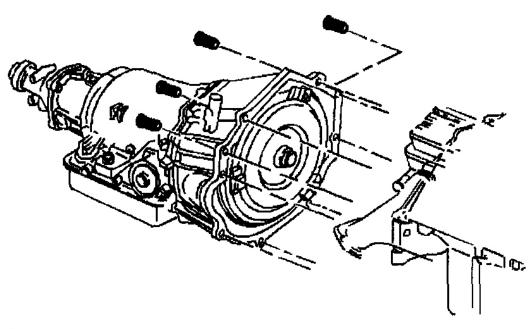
Removing Engine Mount Through Bolts Courtesy of GENERAL MOTORS CORP.
